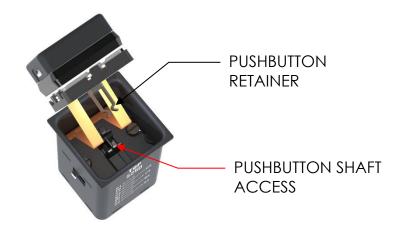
Locking Mechanism (Drip-Proof Version Shown)
